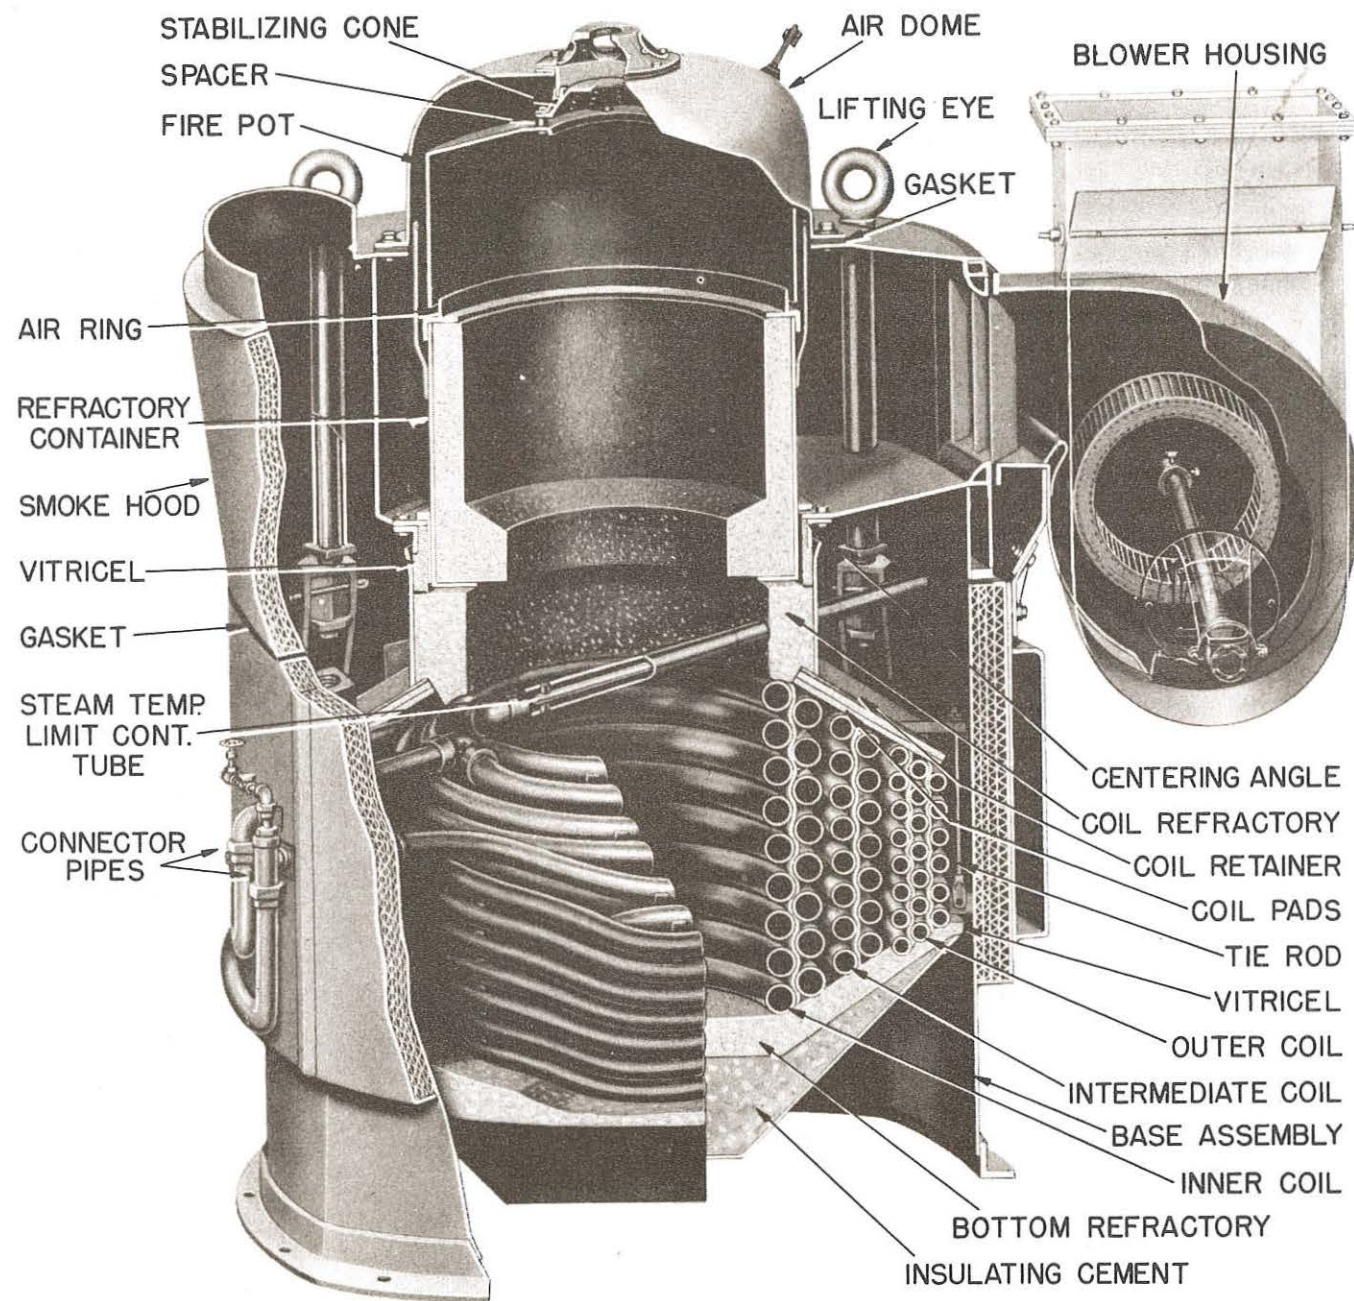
DRK-4530 Boiler and Blower Assembly.
